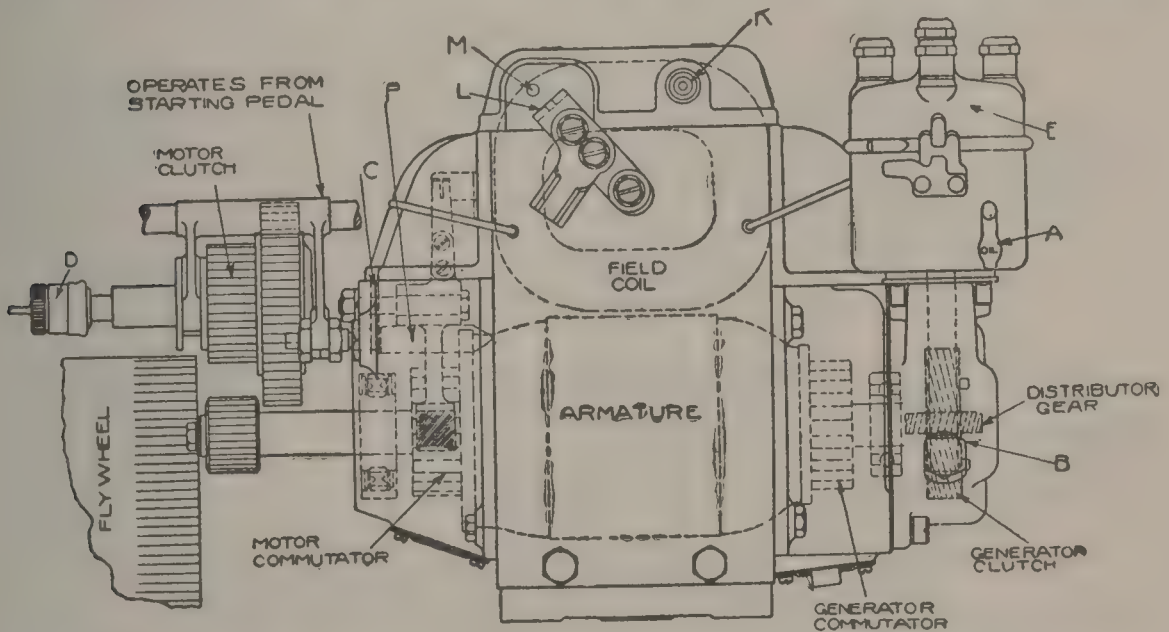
Side view of Delco dynamotor, which usually is called a motor generator
